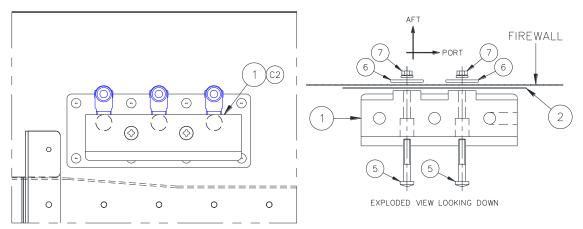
Main view looking aft at the forward face of the firewall. Item 1 assembly fittings have been omitted from the exploded view for clarity.
